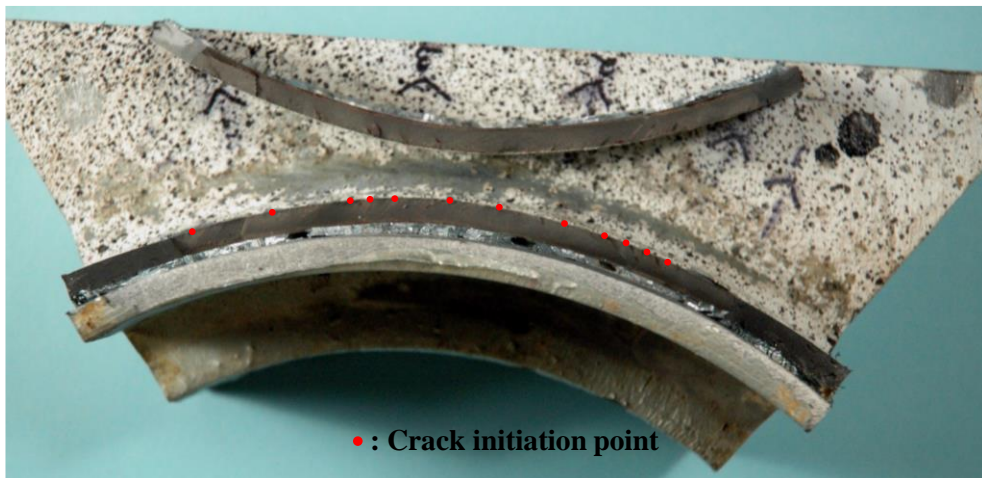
Fatigue fracture surface and identified crack initiation points in Type III-2 Arm
